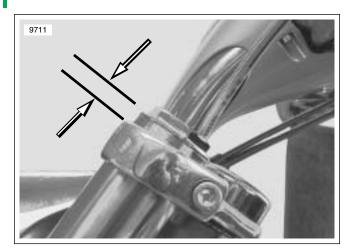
Fork Tube Projection (6.4-9.7 mm)
